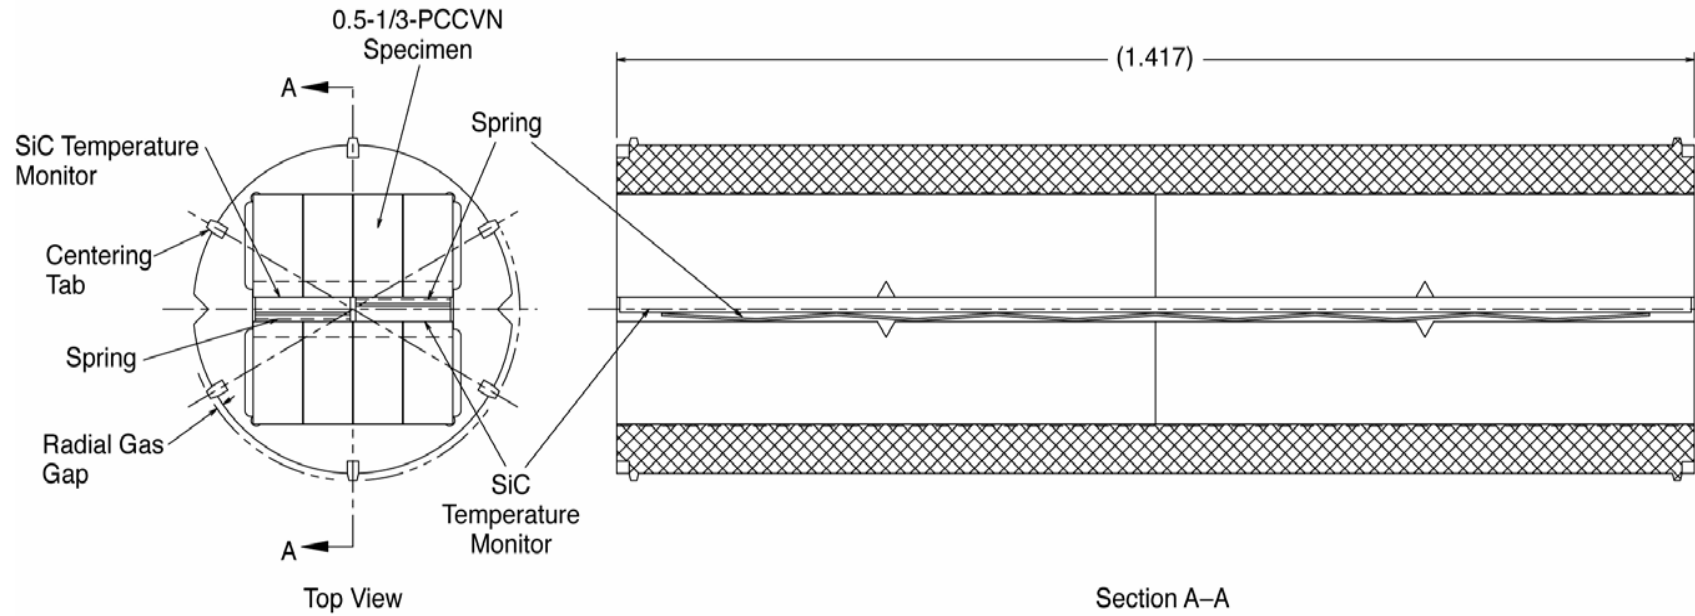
Specimen holder subassembly used in JP-26 for 0.5-1/3-PCCVN specimens
